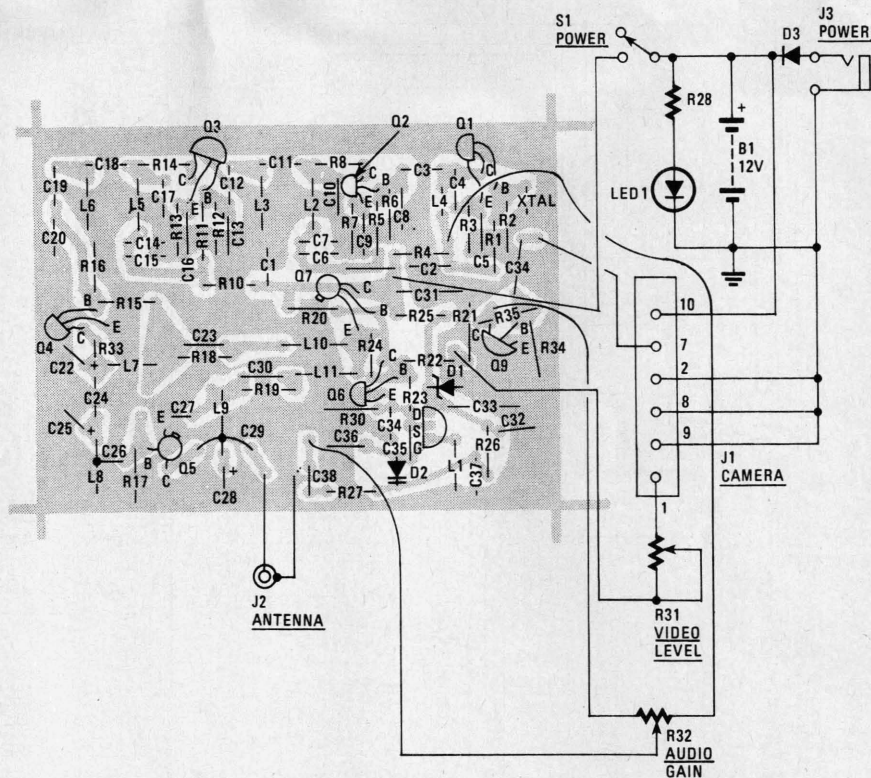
COMPONENTS ARE MOUNTED ON THE PC BOARD as shown here. Note how R31 dangles from the PC board. We suggest you use a more secure method of mounting that potentiometer than we did.
